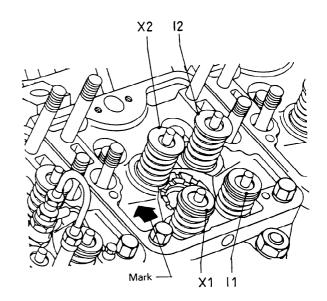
Inlet valves at right, exhaust valves at left of observer (example for valves in row, exhaust manifold inside V-engine)
